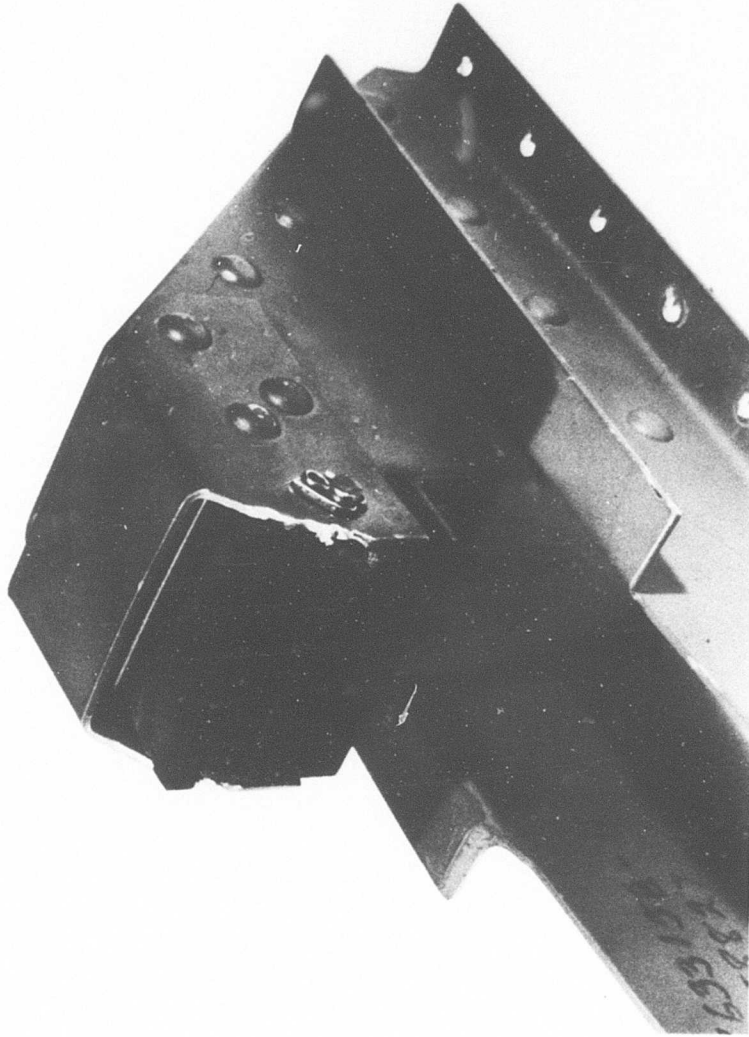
Detail Showing Damage Sustained by New Door Stop.
